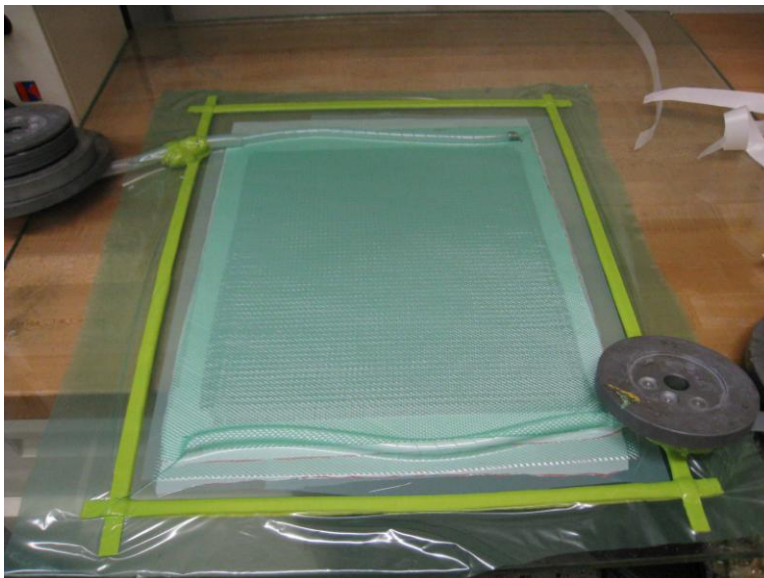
Vacuum achieved using vacuum bag and sealing tape
